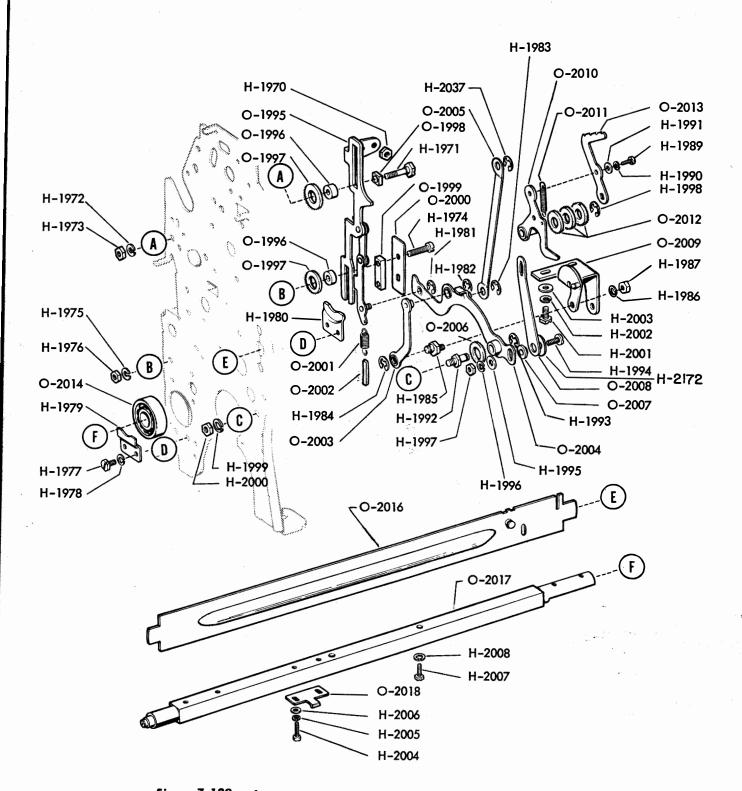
Automatic Typer, Left Side Linkage and Stripper Blade
